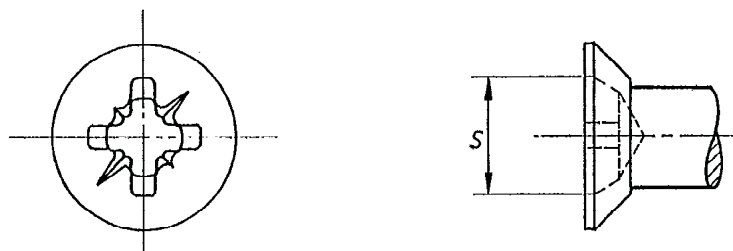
Recessed truncated countersunk head machine screws: enlarged views of recess type V
